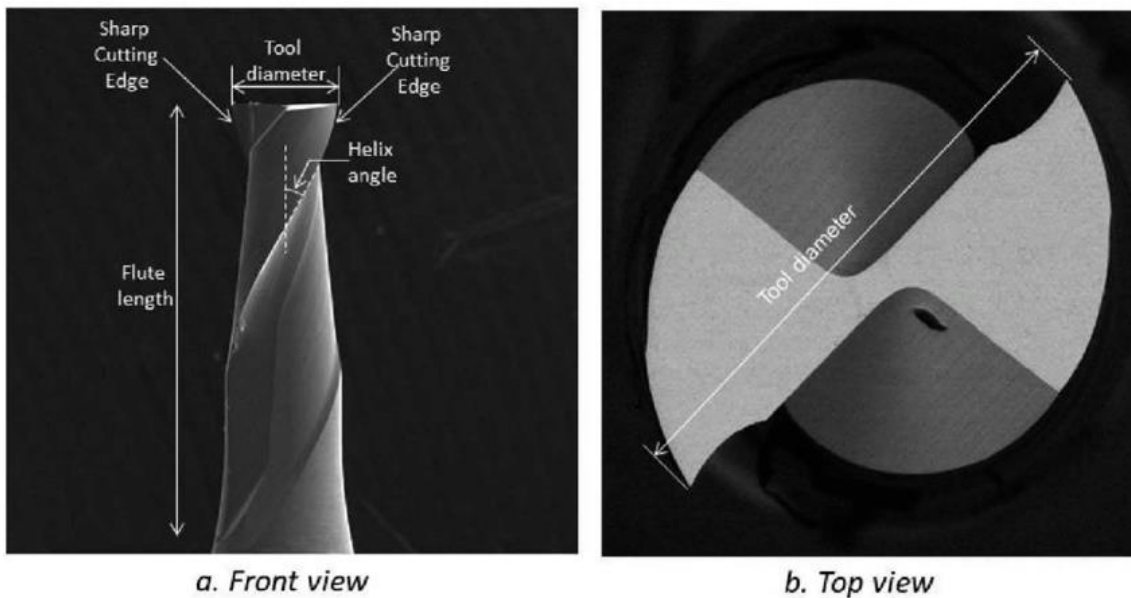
3 SEM image of the micro mill clearly indicating the tool geometry [3].
